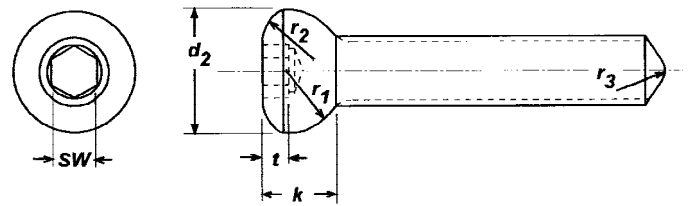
Schematic of HA Screw Dimensions (Table A4.1)
